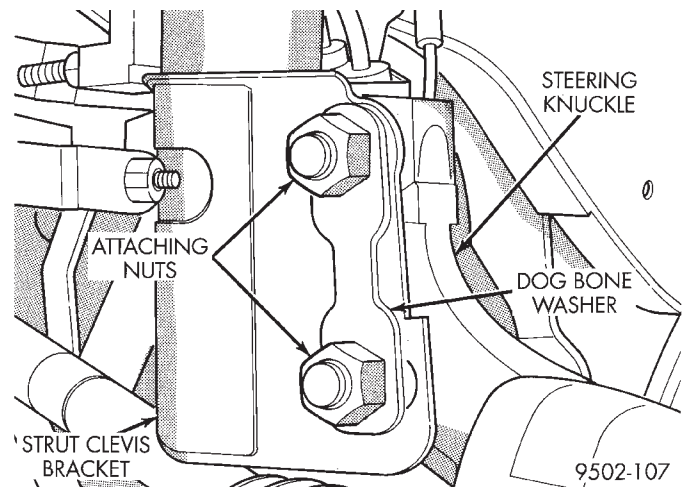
Dog Bone Washer And Nuts Installed On Attaching Bolts
